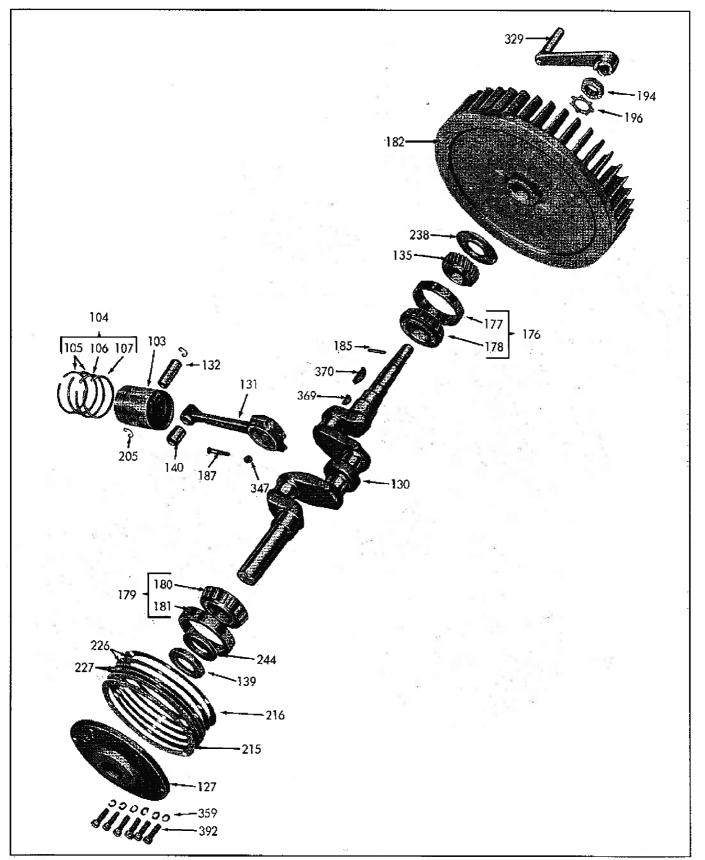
, CRANKSHAFT, PISTON AND CONNECTING ROD GROUP Parts are identified by reference number. See parts list for correct part number.
